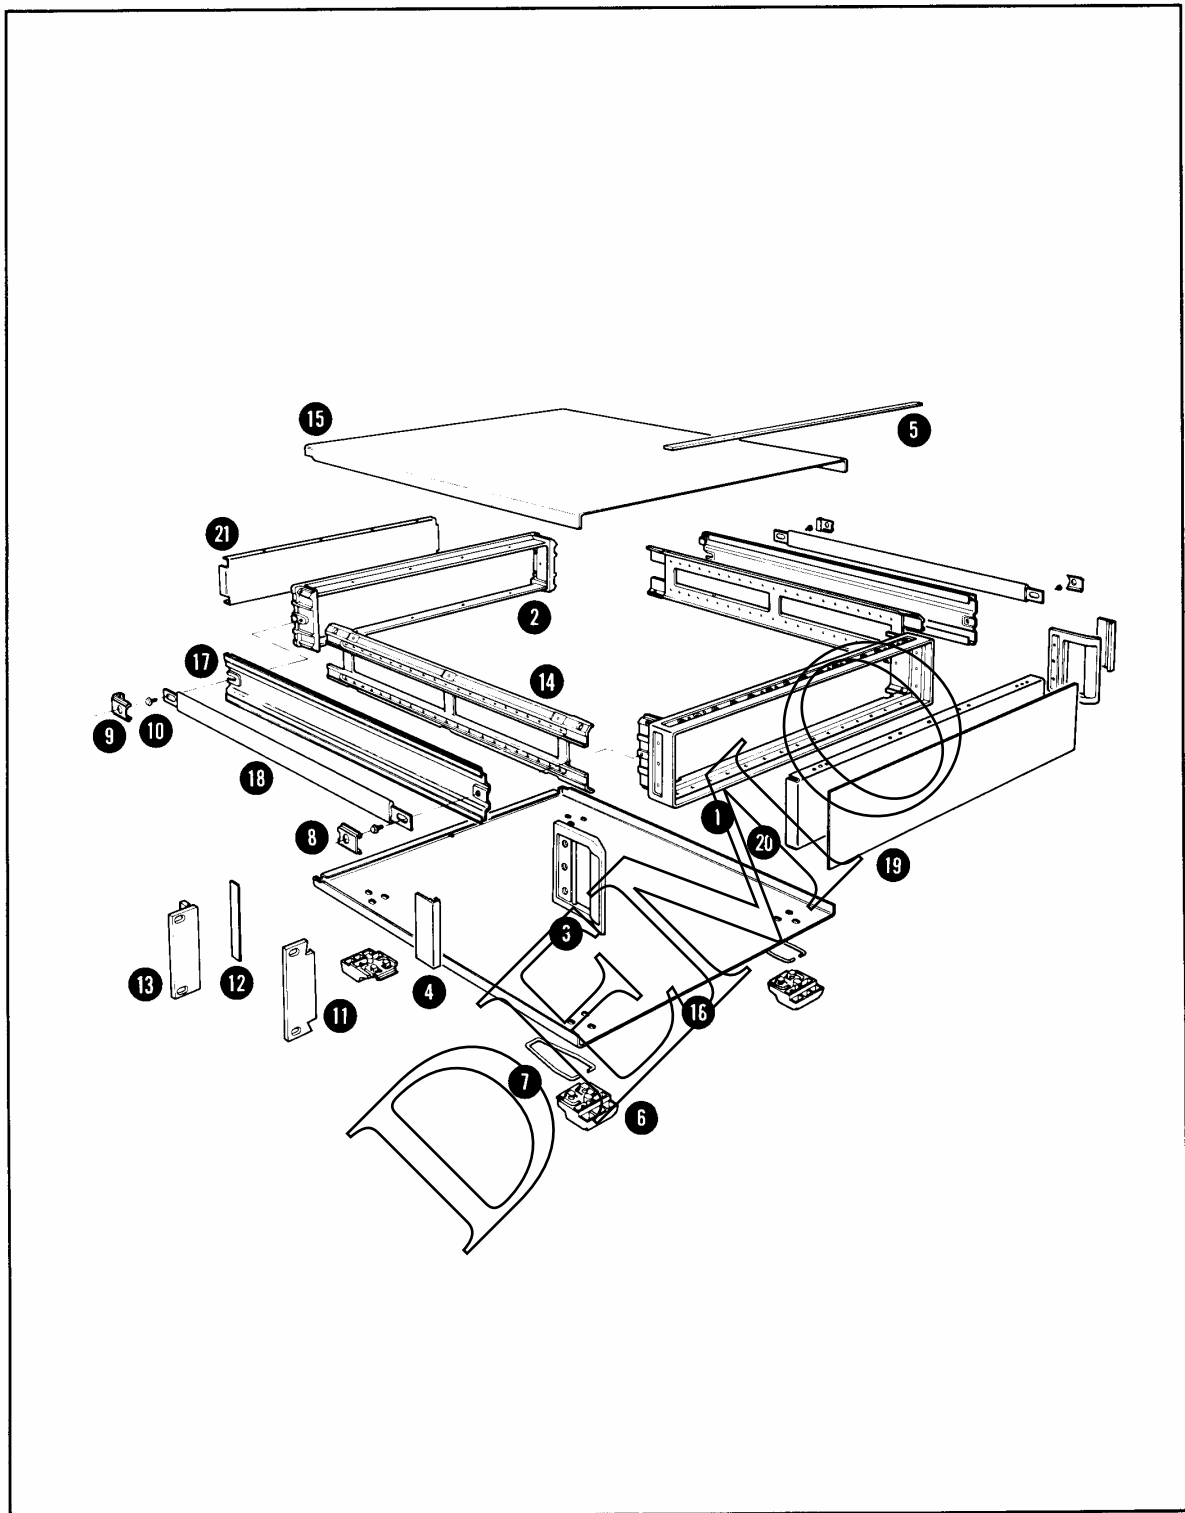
Cabinet Parts, Exploded View (1 of 2)
